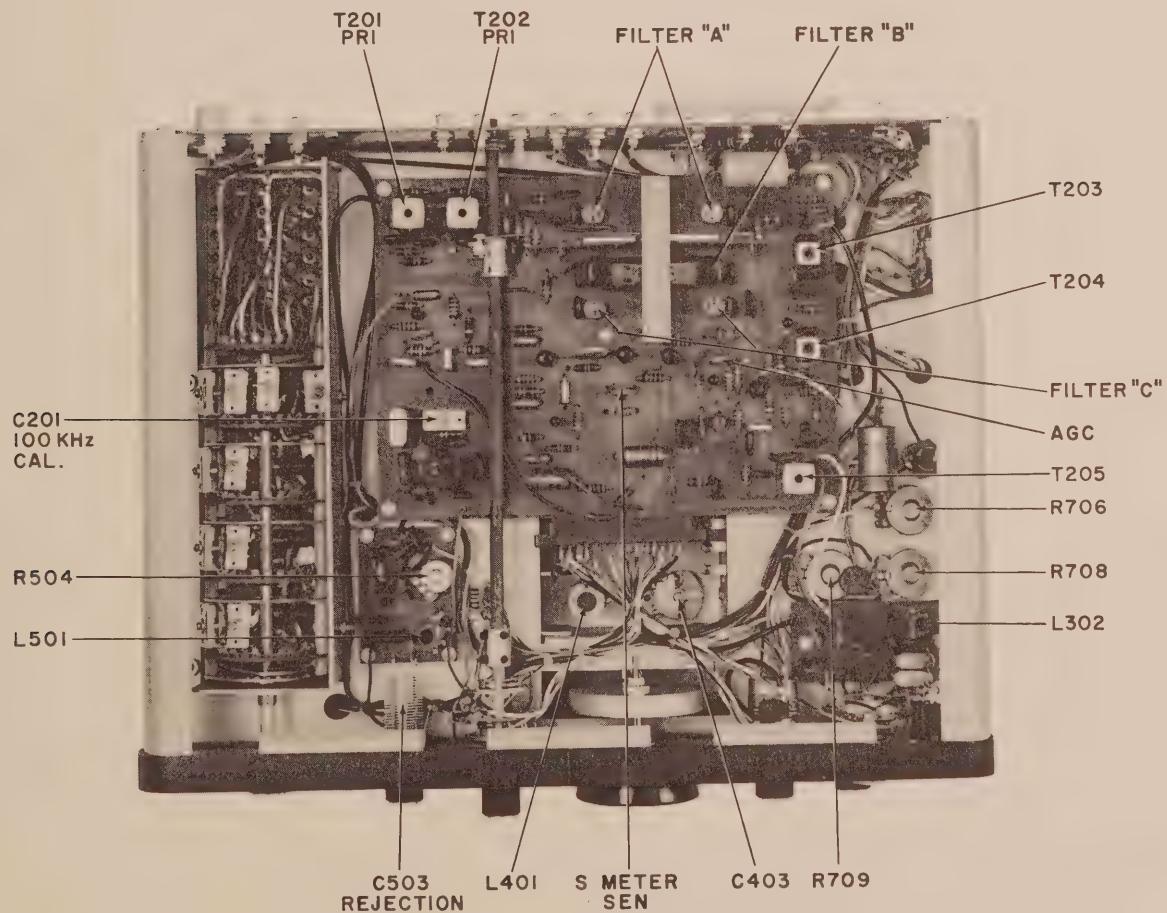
BOTTOM VIEW OF HQ-215
